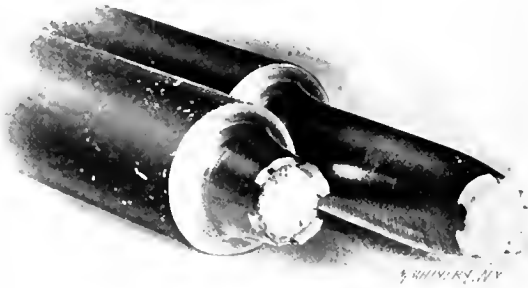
Test Bar, 1-2 inch Diameter Vanadium Axle Steel. Star Fracture.
